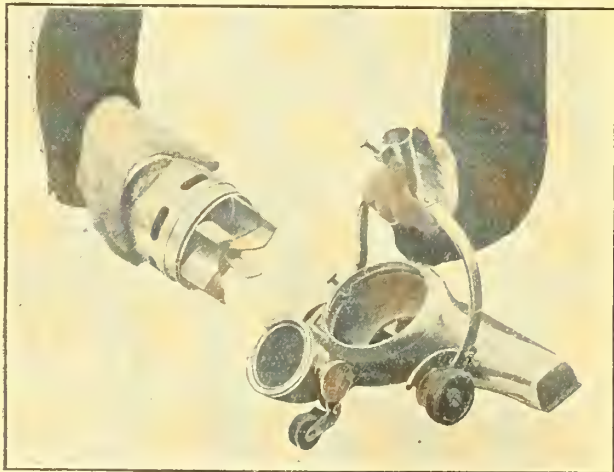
MOTOR AND FAN REMOVED FROM HEAD OF CLEANER.
